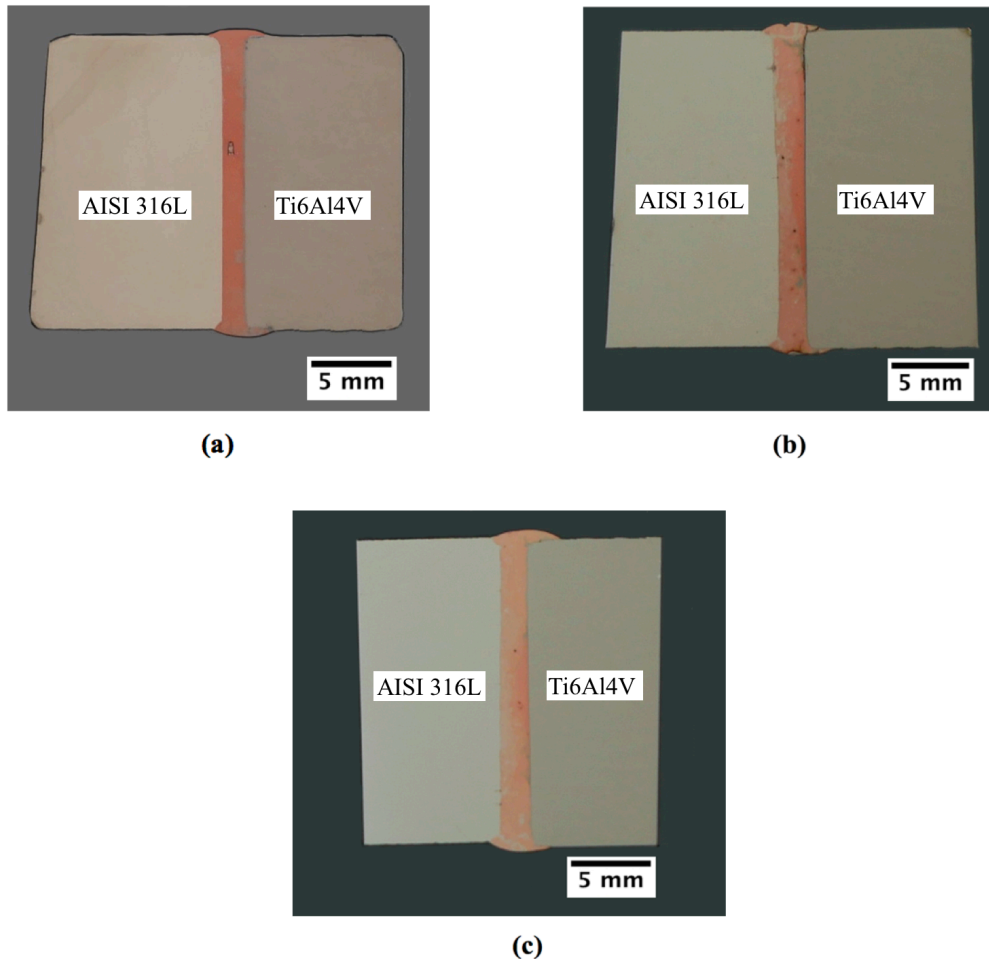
Cross section of Ti6Al4V-AISI 316L double pass welded preheated samples (a) weld 21 (b) weld 22 (c) weld 23. All welding parameters are listed in table 3.11.
